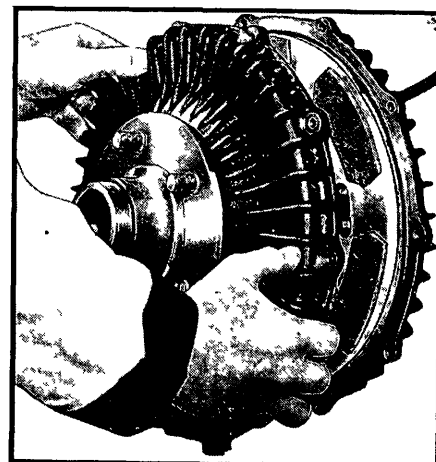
Removing hub and outer brake housing. Chrysler front disc brake
